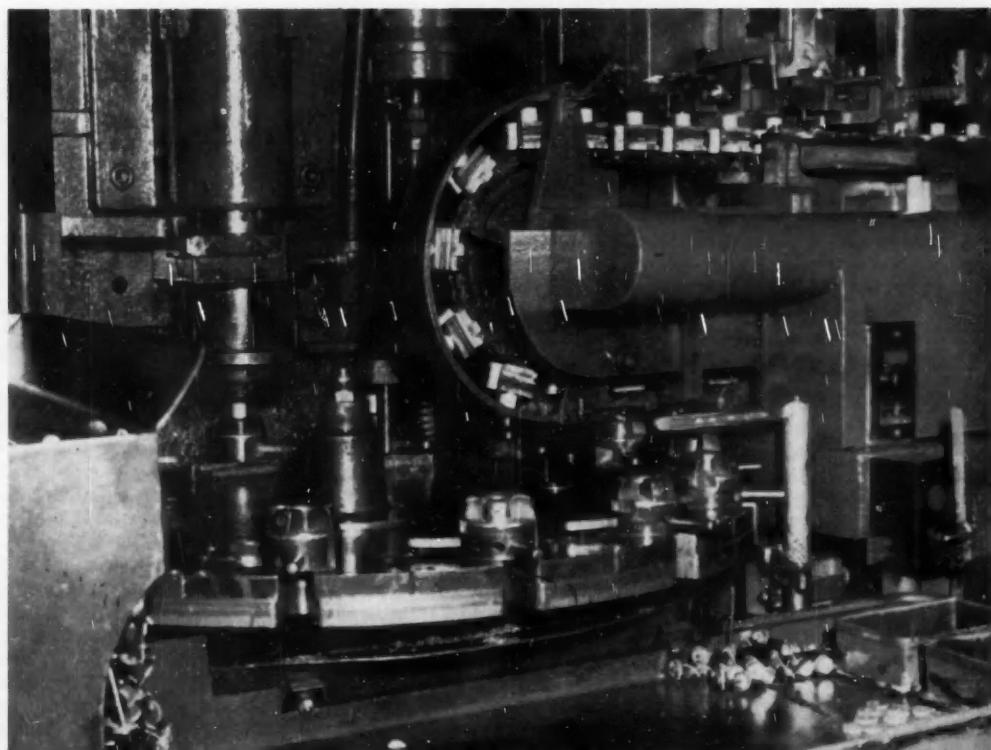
Finished ignition condenser assemblies being inverted where they are mated to hand-fed leads in crimping dial
